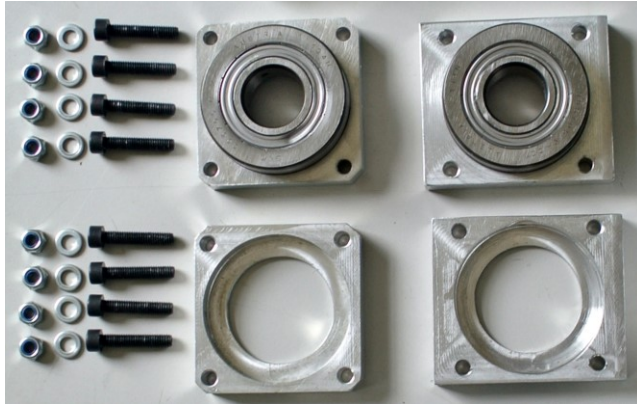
The bearing supports of the B and C drives. The bearings are shown inserted in the supports.
